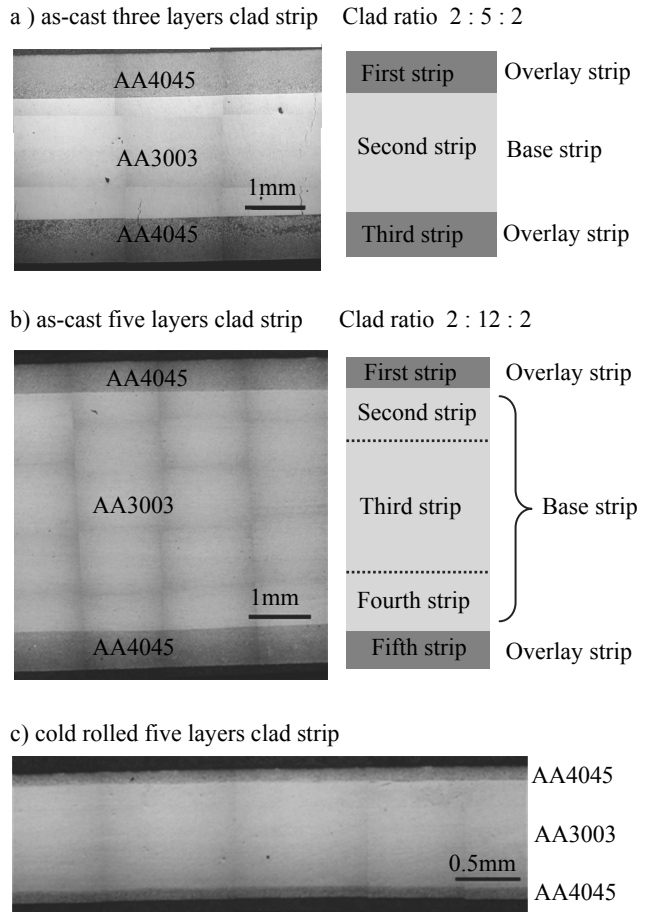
Cross section of the three layers clad strip and five layers clad strip. (a)three layers clad strip, (b)five layers clad strip, (c) cold rolled five layers clad strip
